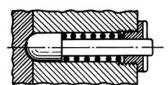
The plunger is turned down slightly smaller than the inside diameter of the spring which gets its other bearing against the threaded plug, the hole in the plug guiding the stem of the plunger.
